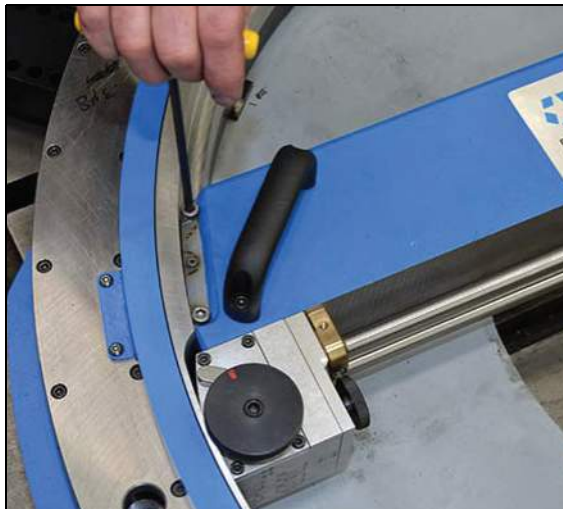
ATTACH THE SLIDE ASSEMBLY TO THE RDU (FF3600 SHOWN)
